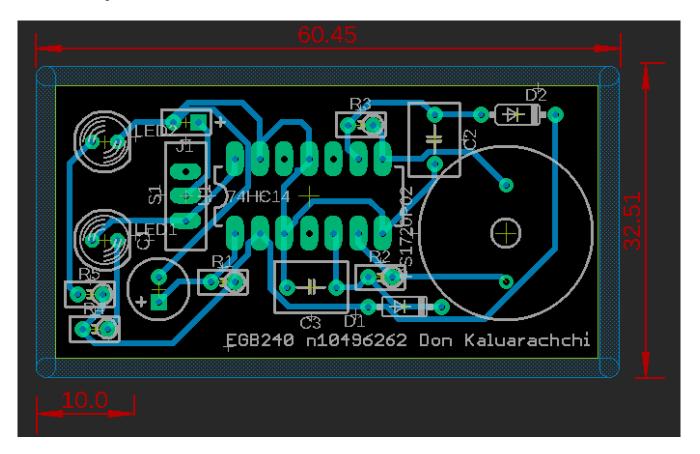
PCB Layout of alarm circuit (component side view) showing overall board dimensions.
